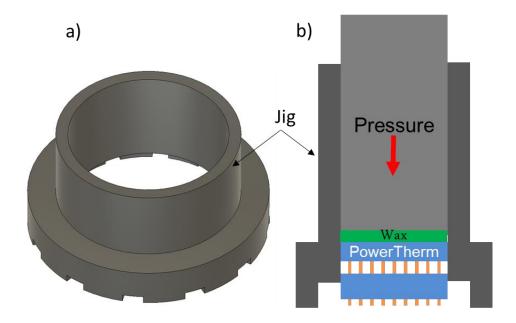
a.) Stainless steel jig used for planarizing and polishing Cu pin-fins. Inlets were provided at the bottom for slurry ingress. b) Schematic cross-section image showing pressure applied by a block on the pin fins during CMP.
